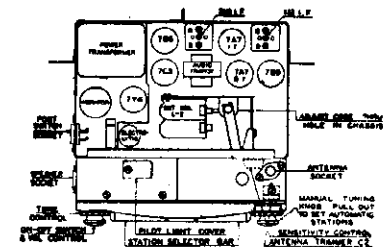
Top view of Chassis 6D80, 6D80E, 6D90, and 6D90E.
